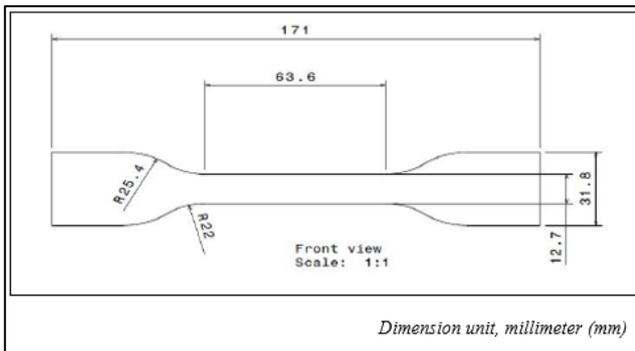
Schematic Drawing of ASTM D2209 Standard for Leather
